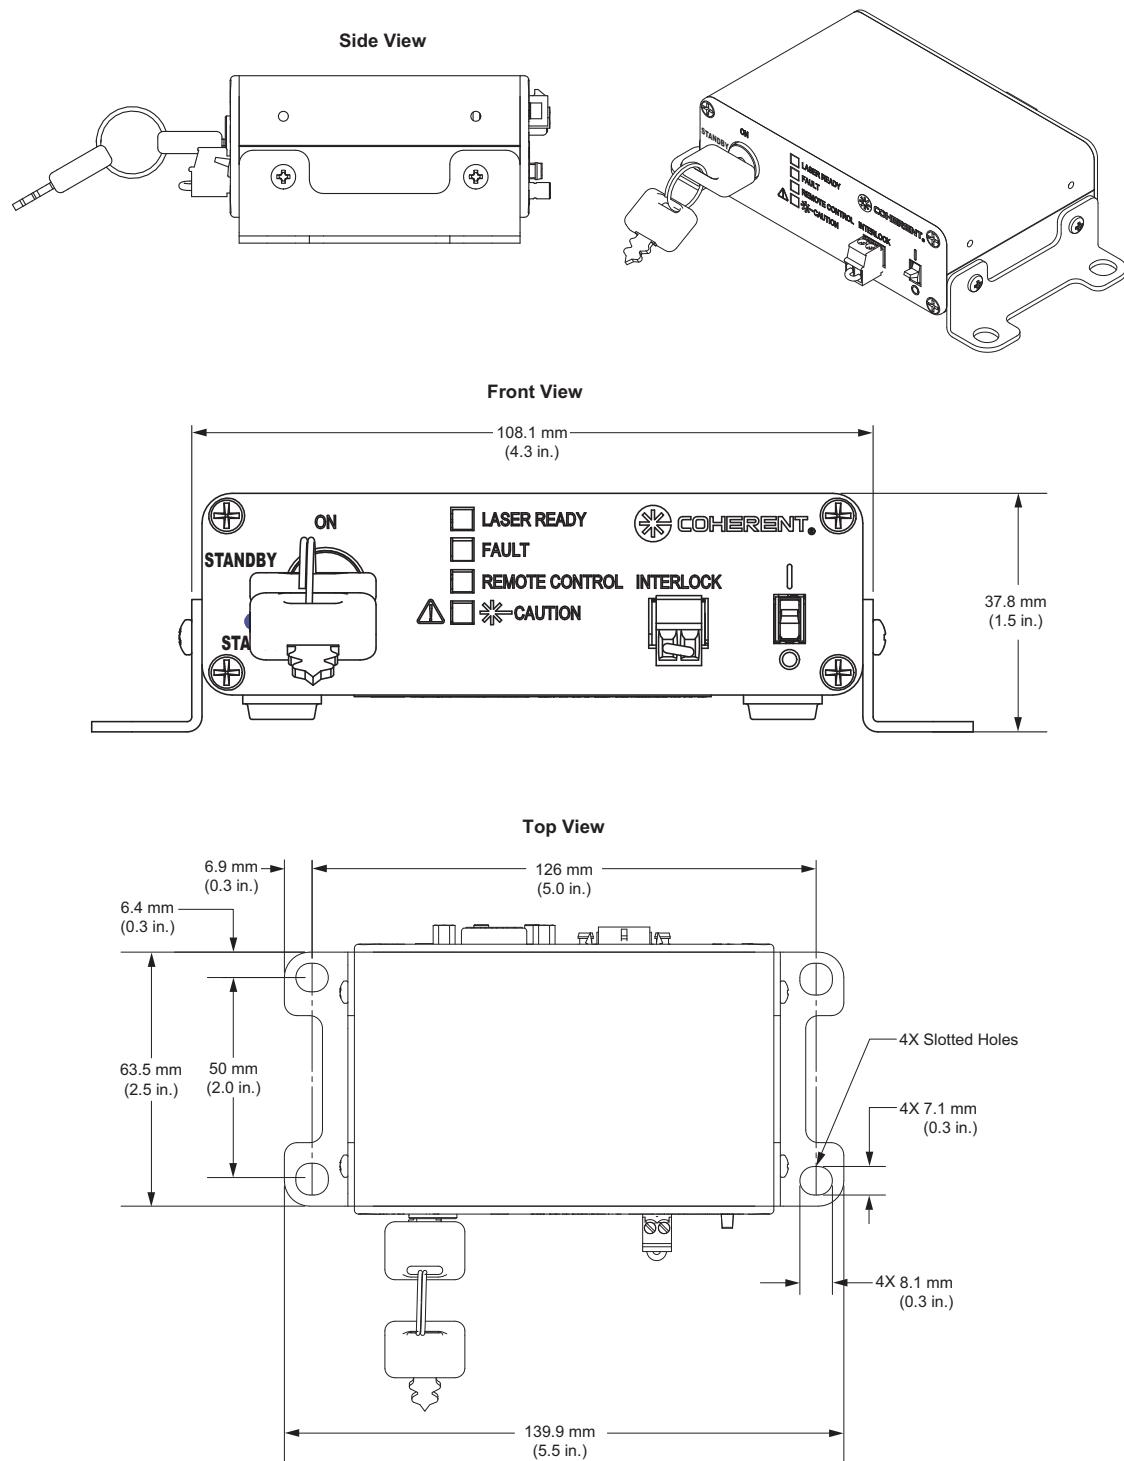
OBIS Remote (with Mounting Brackets) Dimensions
